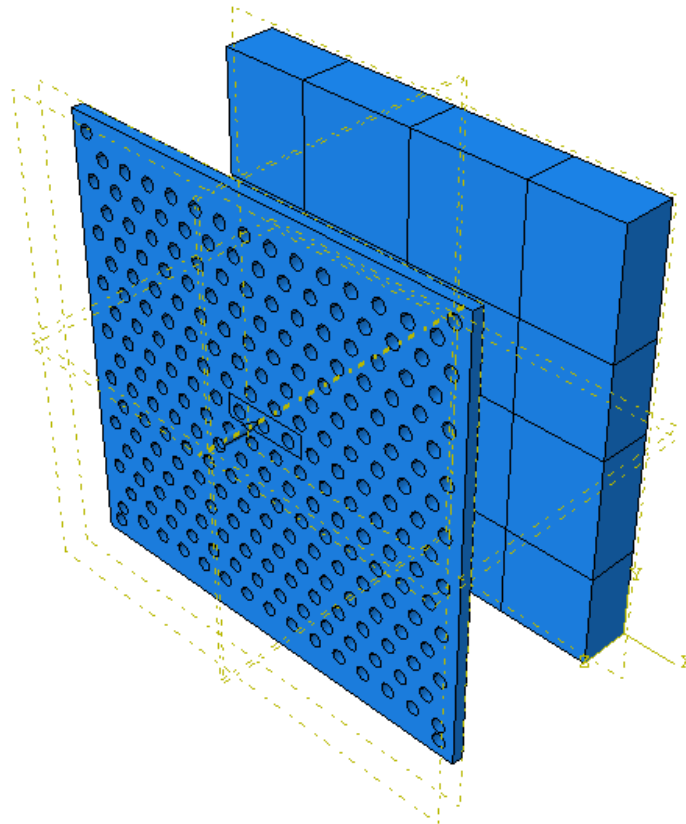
Assembly of Case-2: Impact on High Harness Plate with Circular Perforations
